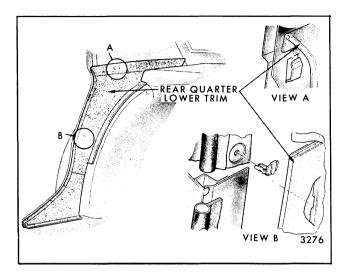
Quarter Trim Assembly Attachment - "C" Four-Door Styles
